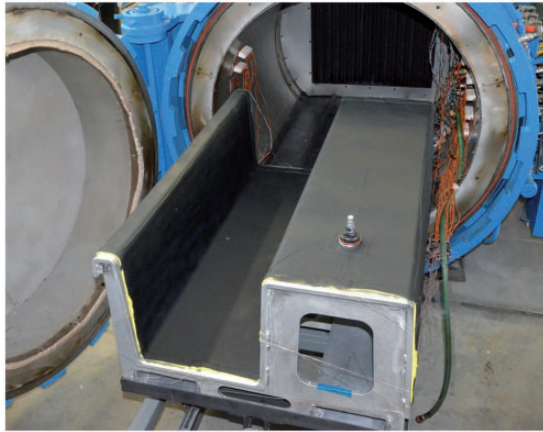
A tool covered with a painted vacuum bag before loading into the autoclave.
